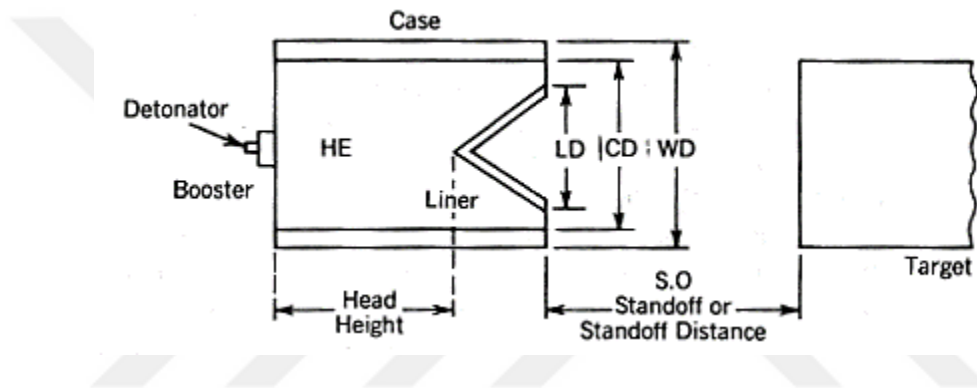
The Nomenclature of the Dimensions of a Shaped Charge; CD: Charge Diameter, WD: Warhead Diameter, LD: Liner Diameter [1]
